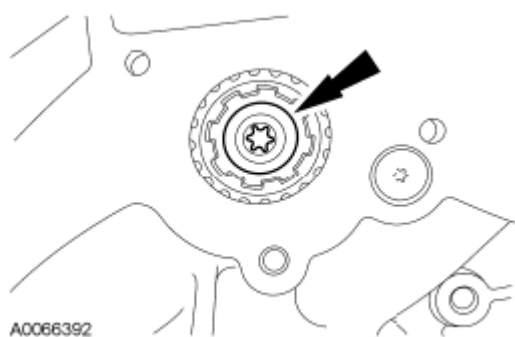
Locating Rear Jackshaft Sprocket Bolt
